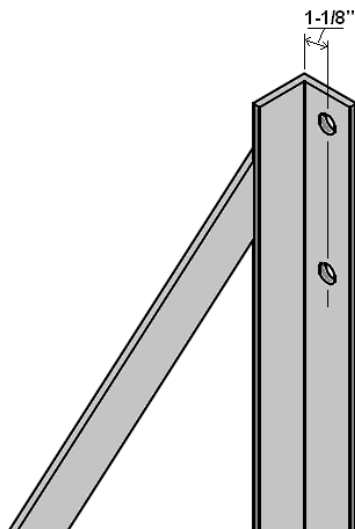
Illustration of 1-1/8" measurement from outer edge of the flanged side to the hole center-lines on Left Bracket's vertical angle piece
